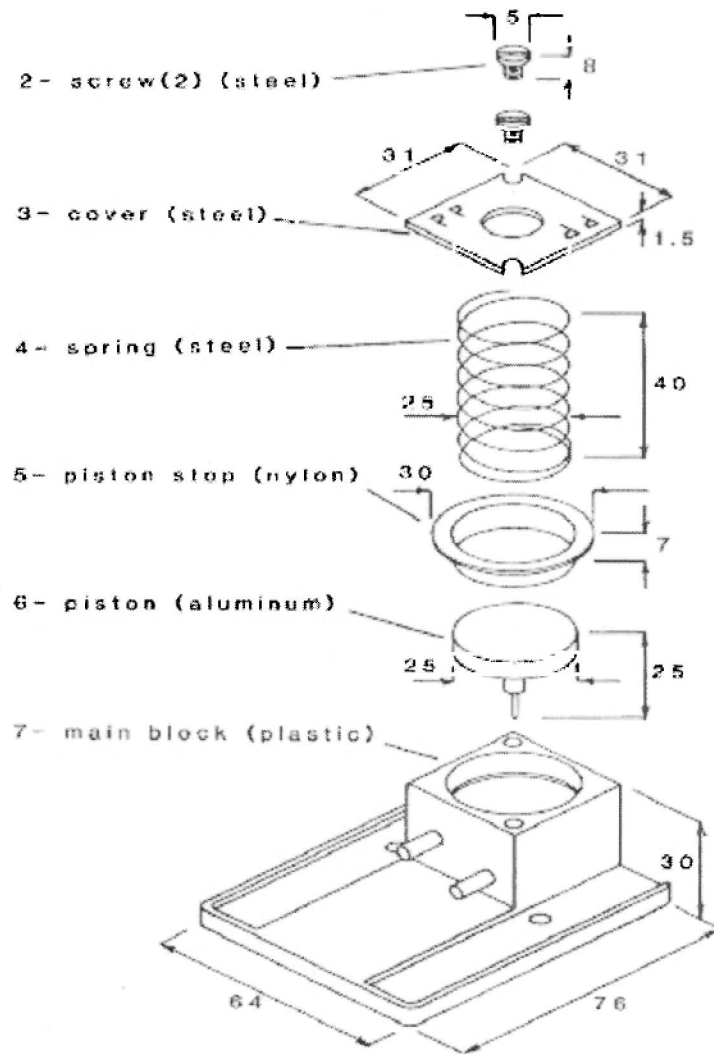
Pneumatic Piston Sub-assembly, dimension in mm
